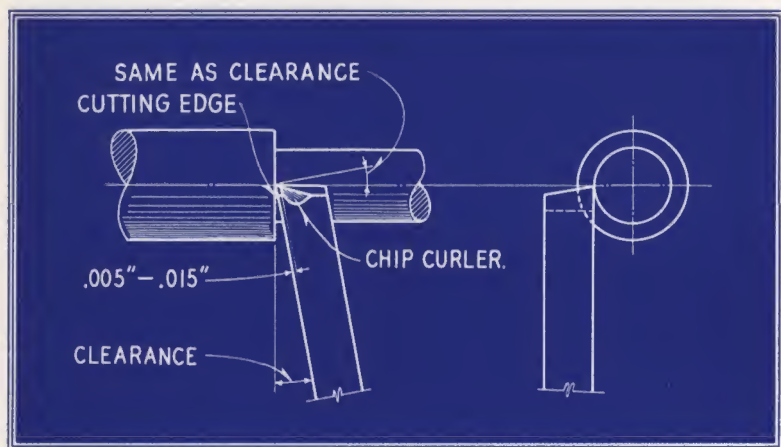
Box tool for machining Alcoa 17S-T and 24S-T alloys.
